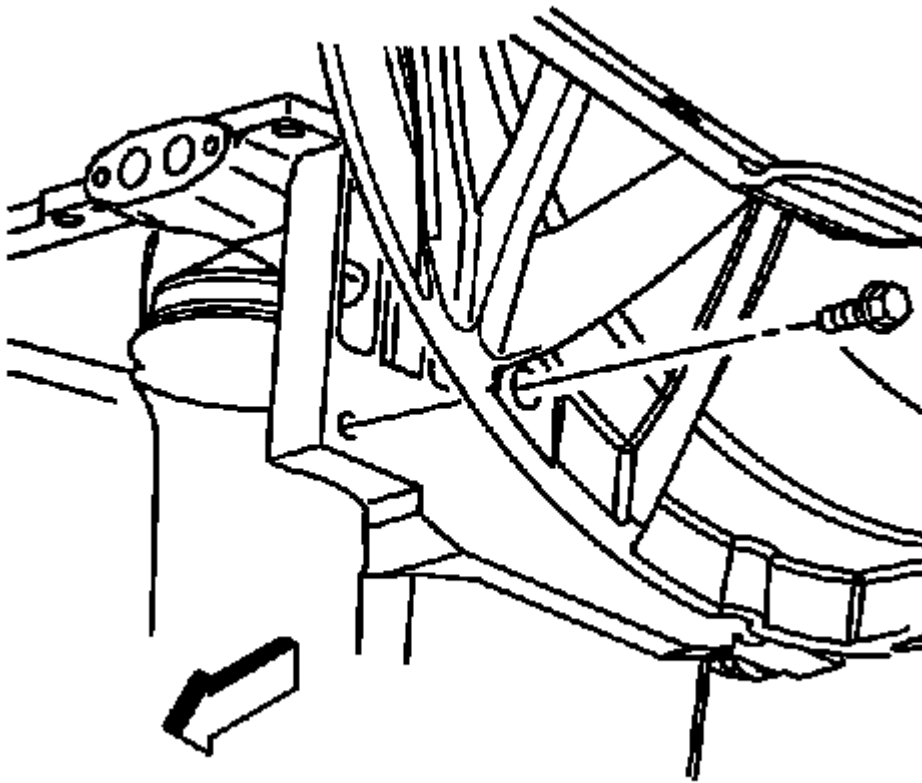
View Of Transmission Converter Cover Bolt (4L80-E)
